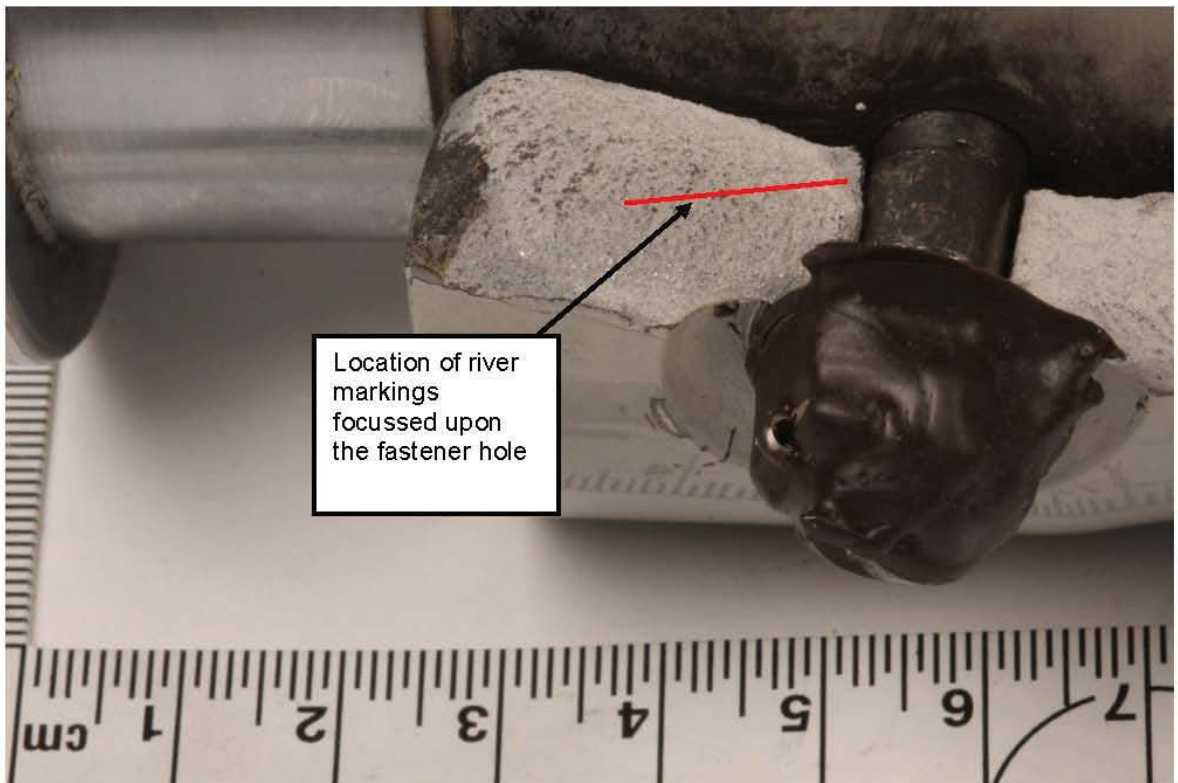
Showing the details of fracture surface 'A1'.
